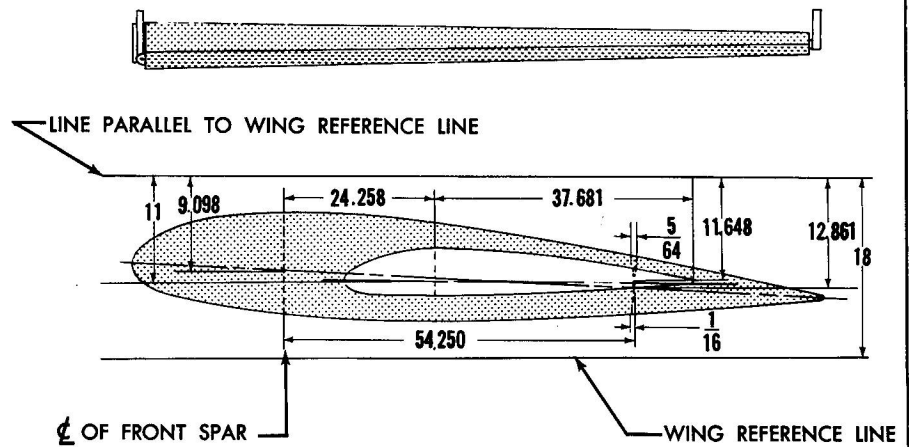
Outer Wing Panel Front Spar Replacement (Sheet 4 of 6 Sheets)
